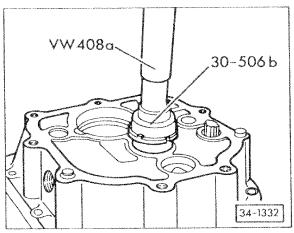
Pinion needle bearing in gear carrier housing, installing
